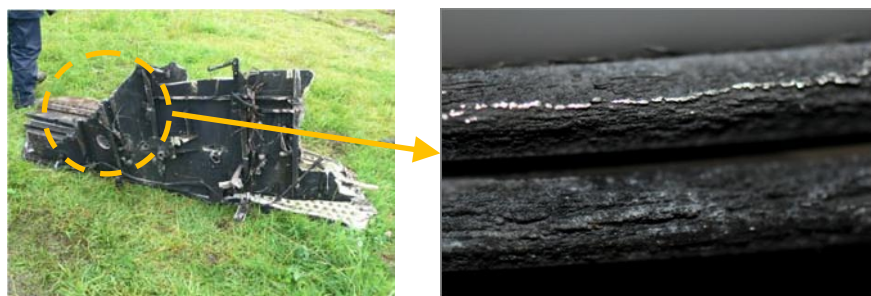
The fracture face of the left wing rear spar (fuselage side)
